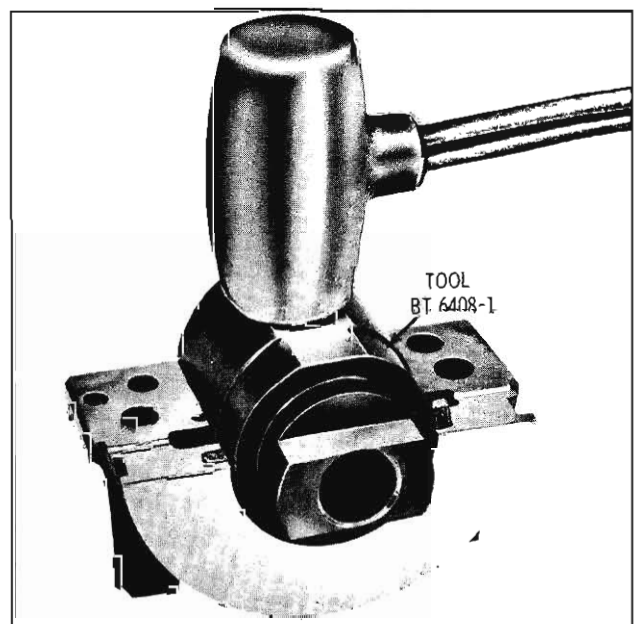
Installing Rear Main Oil Seal—Lower Half
